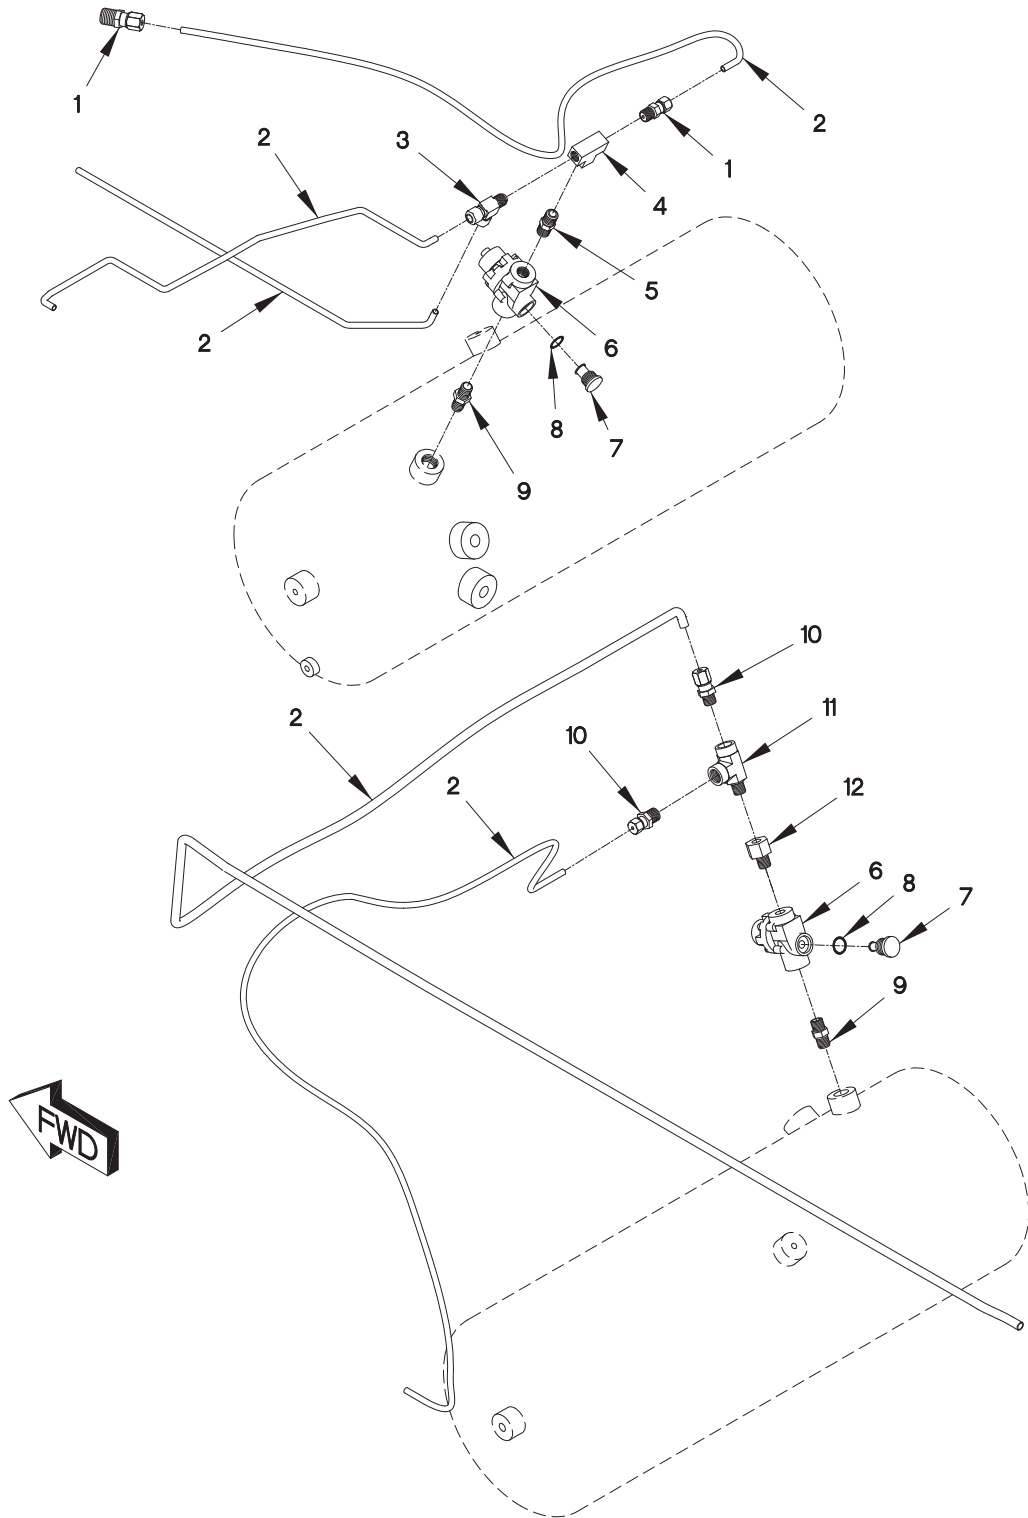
Group 1208 PUSH/PULL VALVES, TUBING & FITTINGS (Sheet 2 of 2).
